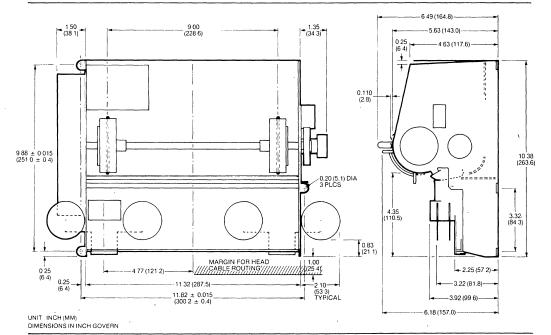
Physical Dimensions of C. ITOH Model 820 Printer
